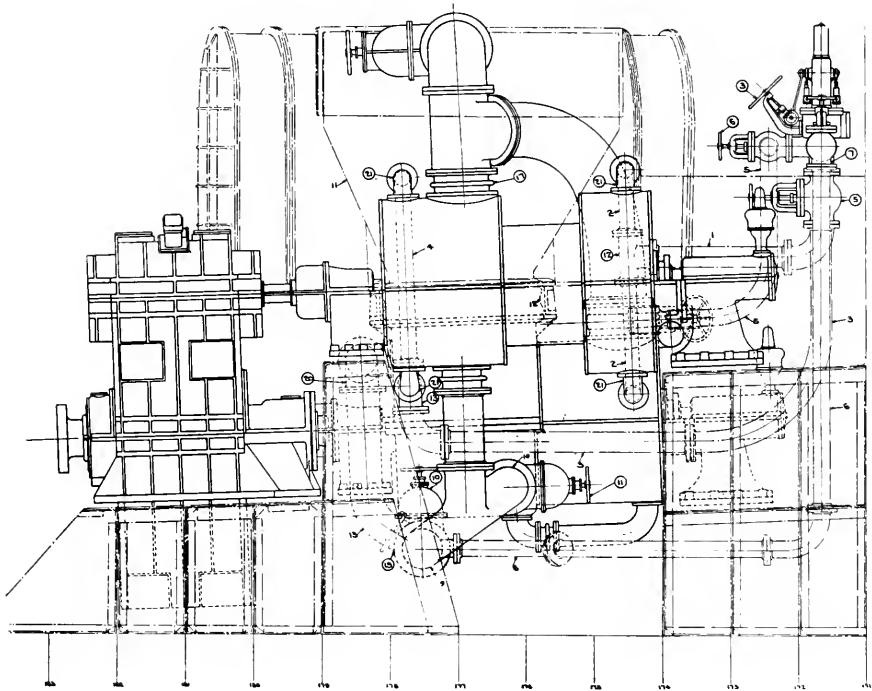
A. Arrangement of port propelling unit (longitudinal elevation).
